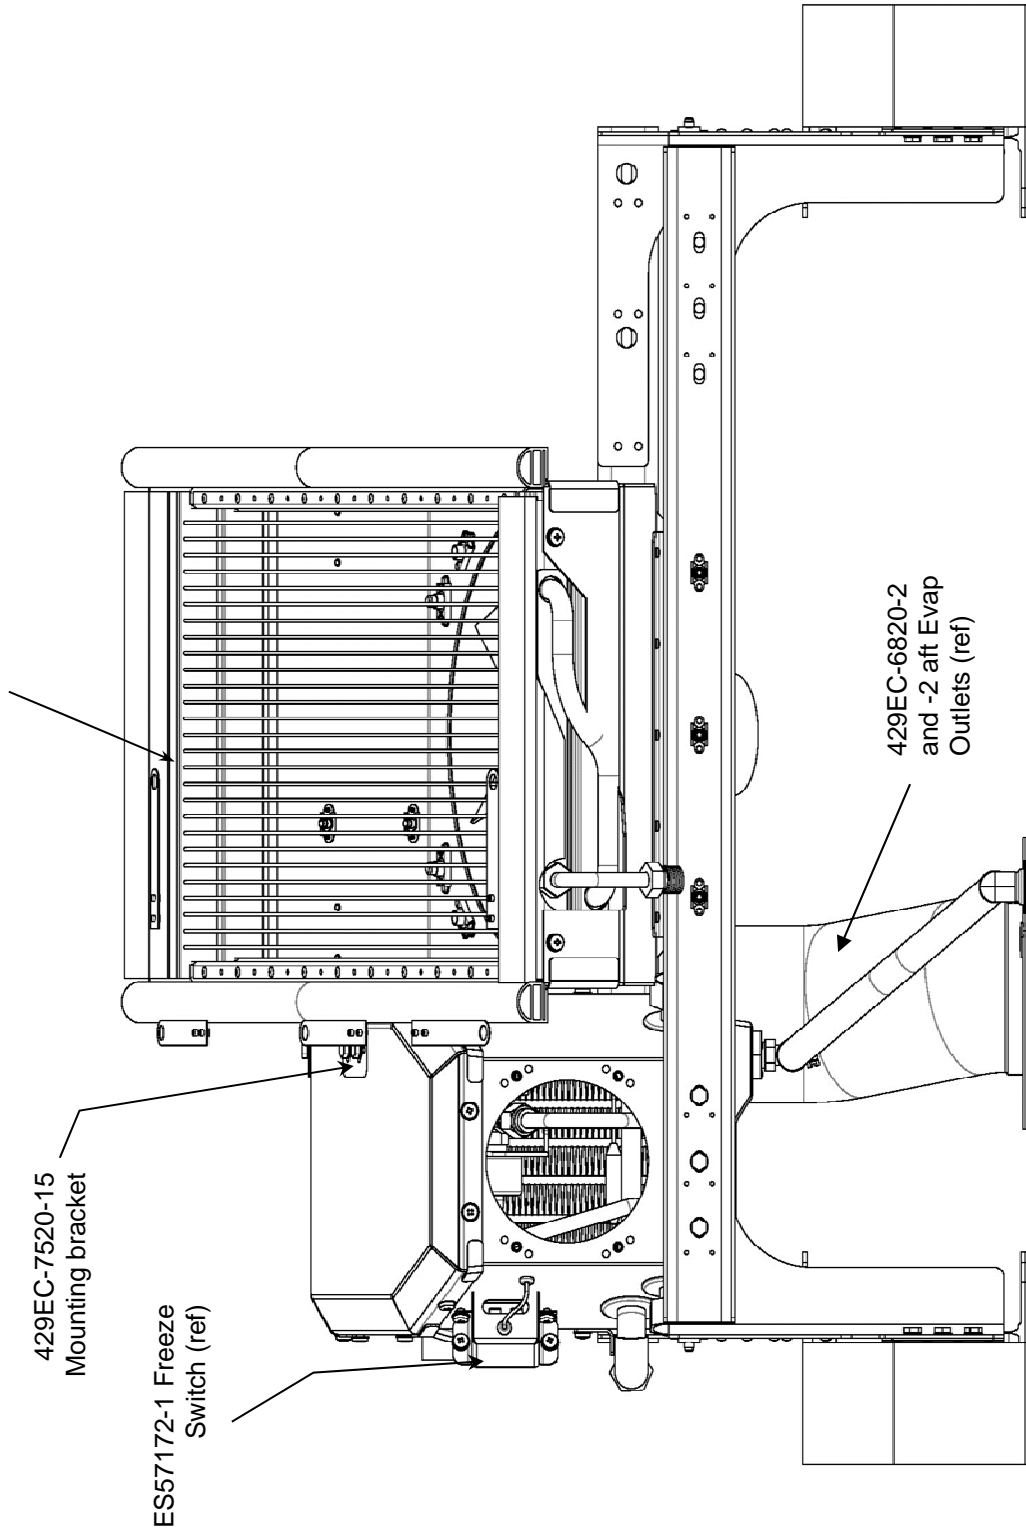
429EC-624 Single Aft Evaporator and 429EC-700 / 429EC-704 Condenser Installation (-202, -206 kits)
